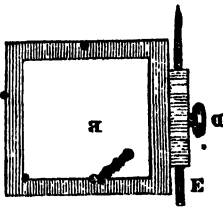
illustrates the old-fashioned machine. A is the bed, or moving board, upon which the box slides. C is the sliding box; to this box the marking point is attached, but, as when the line has been cut by the point, it would be impracticable to move the sliding box back if the point were fixed, it is screwed to a nut which works on a centre in the side of the sliding box, so that when the point has arrived at the terminus of the line it is raised up, and the box then slides back to commence a fresh line. D is the circular nut in the side of the sliding box, working on its centre. E is the marking point, screwed to the circular nut. F is the screw by which the uniform motion is given to the bed of the machine; the width of line varying with the revolution of the screw—a half revolution of the screw producing a nearer tint of lines than a whole, a quarter than a half, and so on. The width is determined by a scale marked upon the screw.
